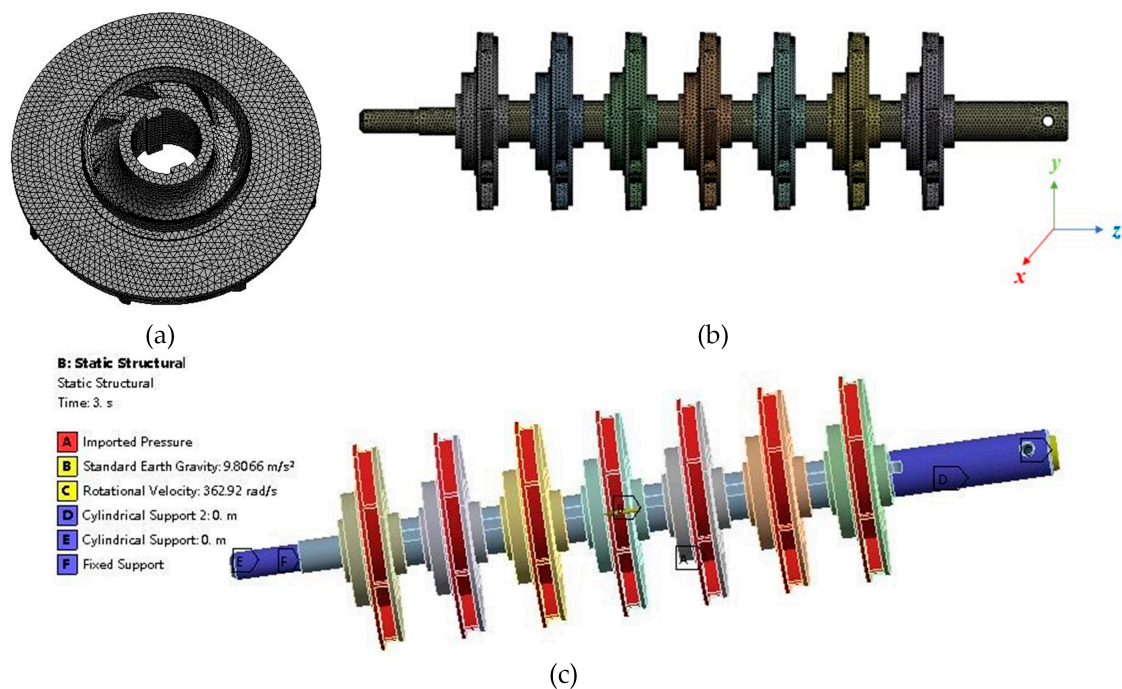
Mesh and constraint settings. (a) Impeller; (b) Impeller and pump shaft; (c) Rotor structure load constraint settings.
